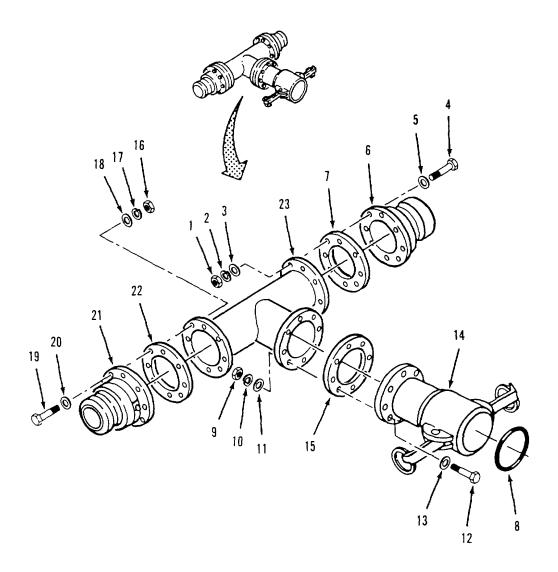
Tee Assembly (9112-Y4) Assembly
